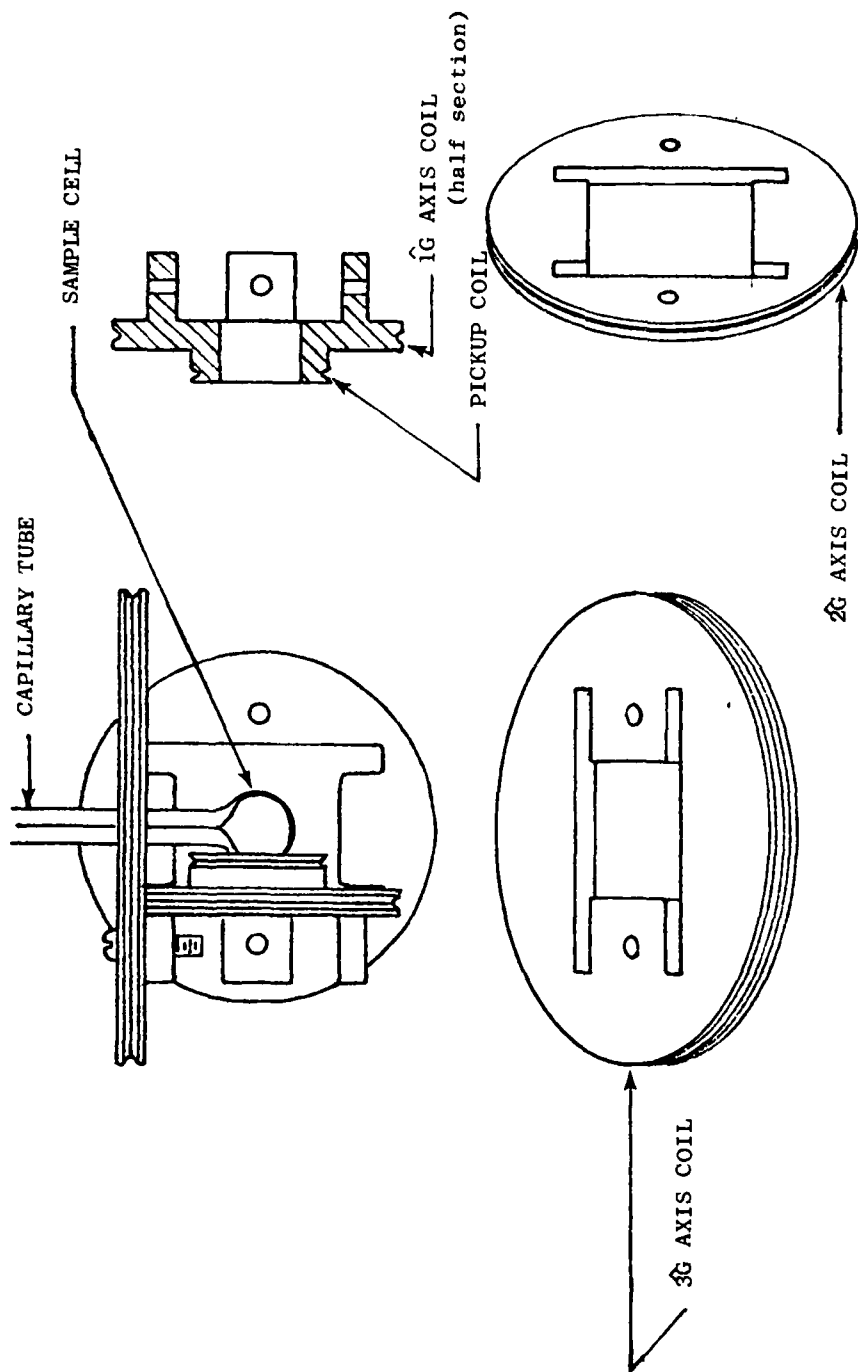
COIL FORM ASSEMBLY (full scale)
